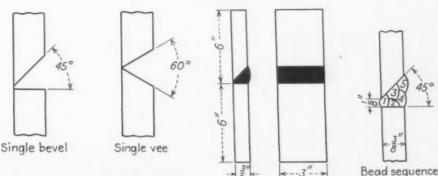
Types of joints used for a horizontal butt weld between two vertical plates.
